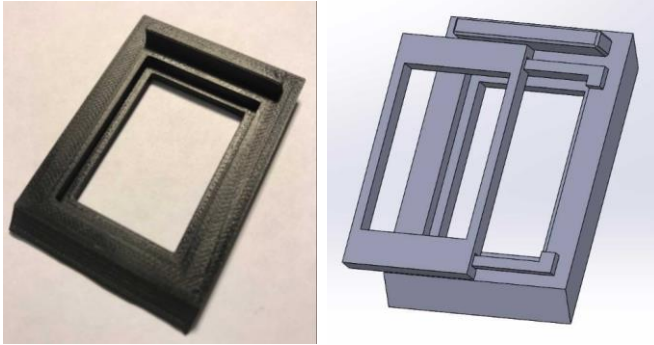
Dichroic and fold mirror holder. The 3D printed holder allows both mirrors to fit securely inside the holder. The top extrude section of the holder allows the mirrors to be taken out of the cube. The holder and filter cube were dimensioned to fall at 45 degree angles inside the cubes.
